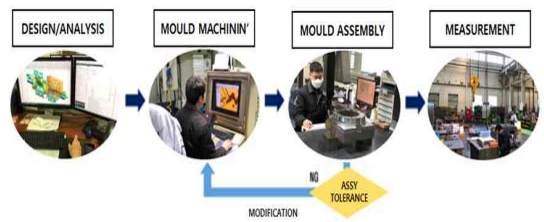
Mold manufacturing process(Compones parts and core cutting process)
